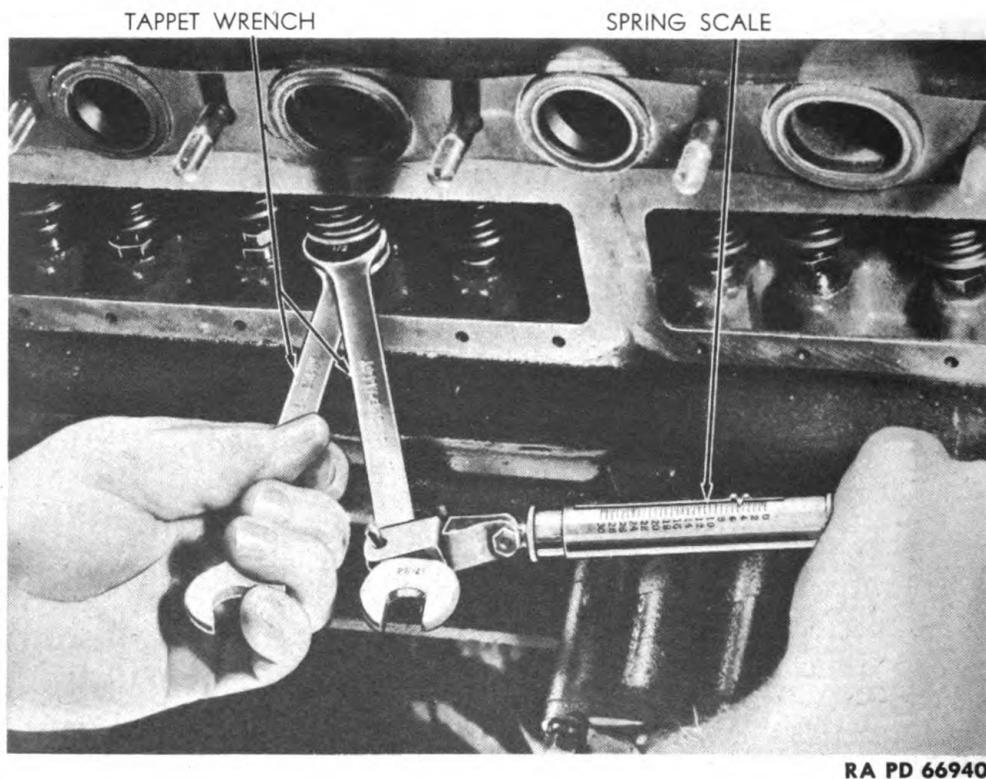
Checking Valve Lifter Adjusting Screw Tension
